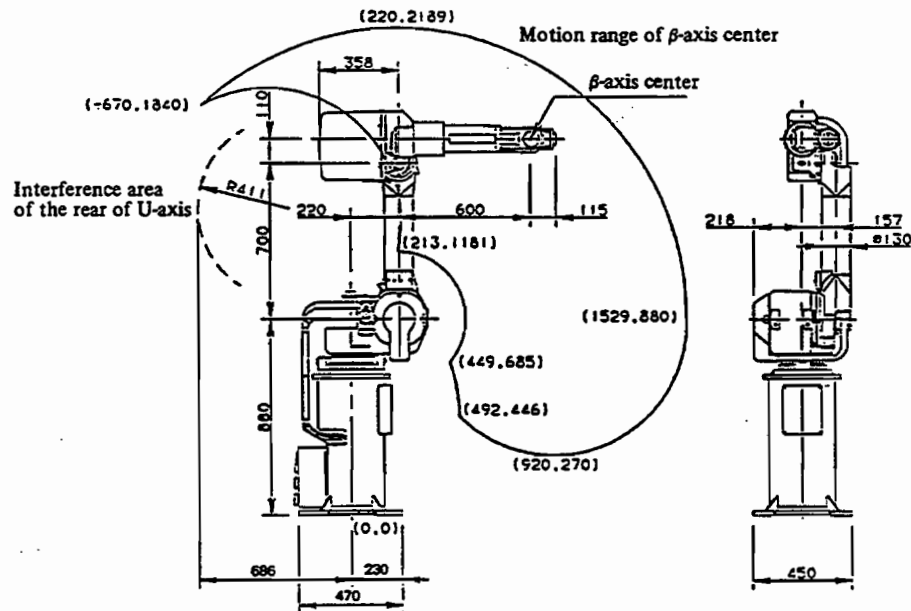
(a) External dimensions mechanical unit (S-10)
